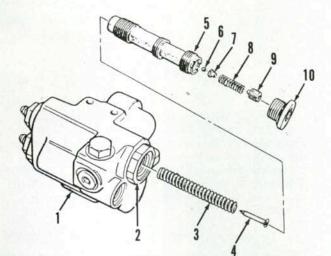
The unload valve incorporates a pilot operated relief valve to protect remote control valves and auxiliary hydraulic pump from excessive pressure.
